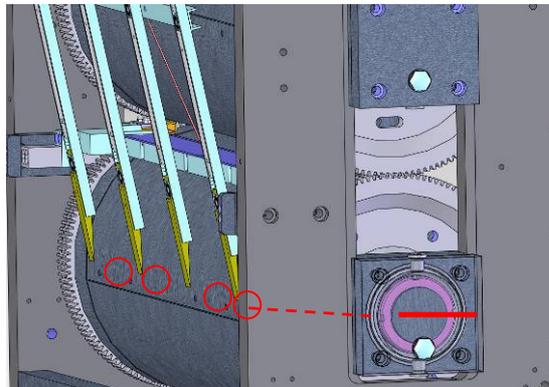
Punching sheet assembly aid and lower magnetic cylinder
